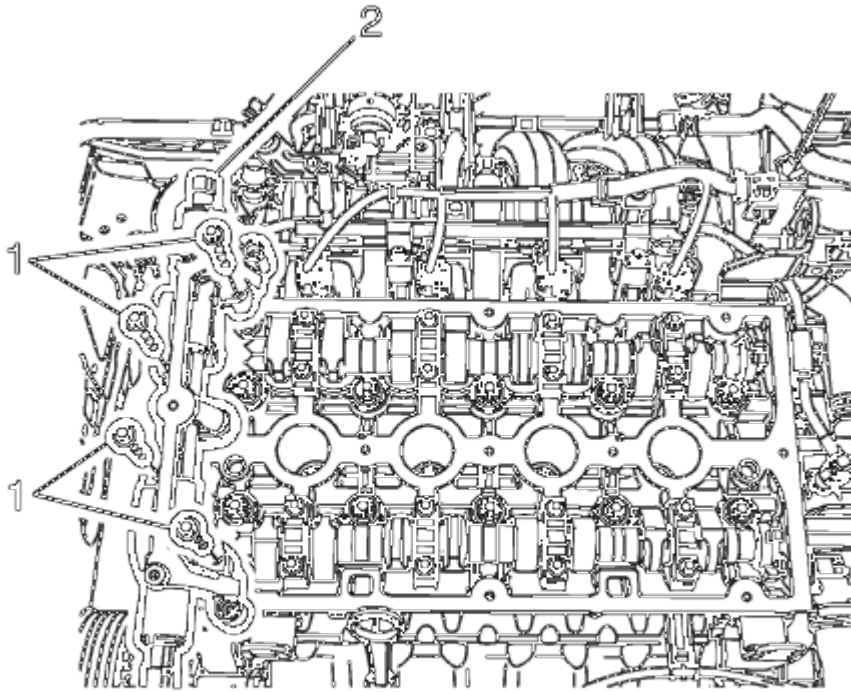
Camshaft Position Solenoid Valve Housing & Bolts
